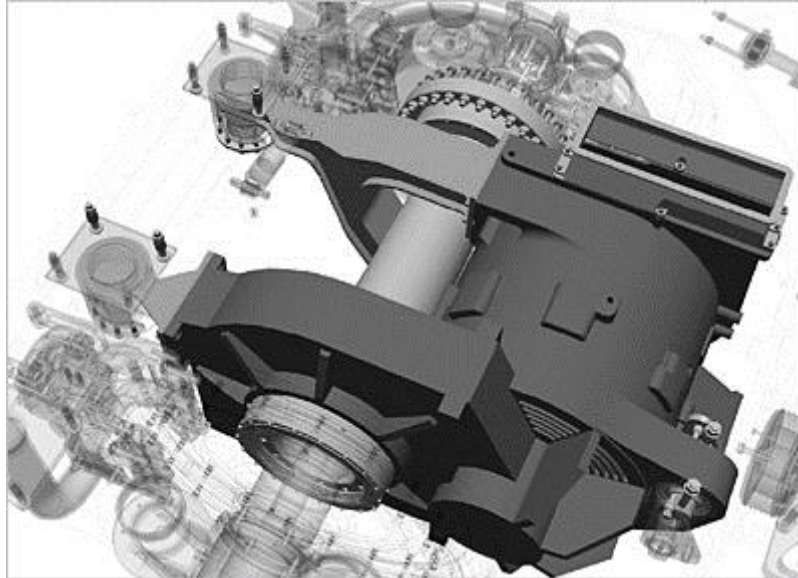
Railway drive system with hollow shaft transmitted torque [16]
